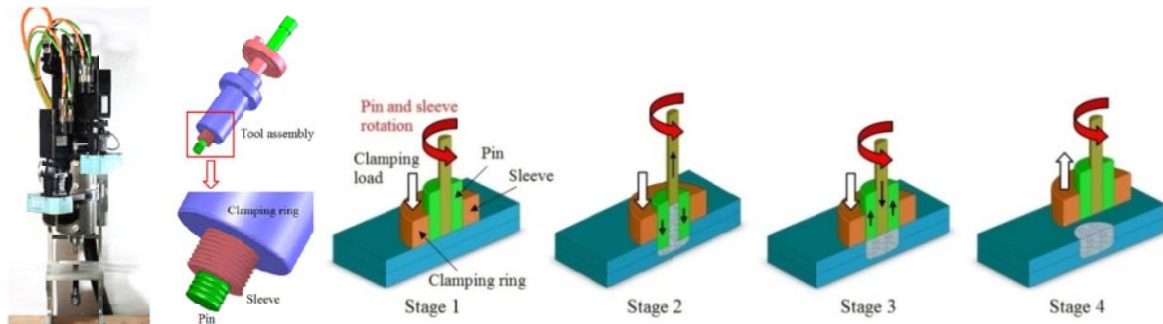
The FSpW Equipment - Stages of the friction spot welding sleeve plunge variant.
